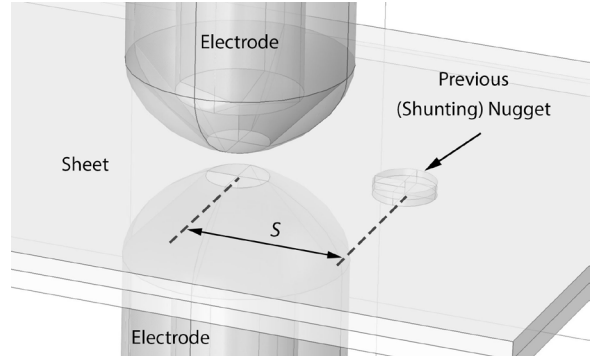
Welding configuration, showing shunting (previous) nugget and other parts in FEM model
